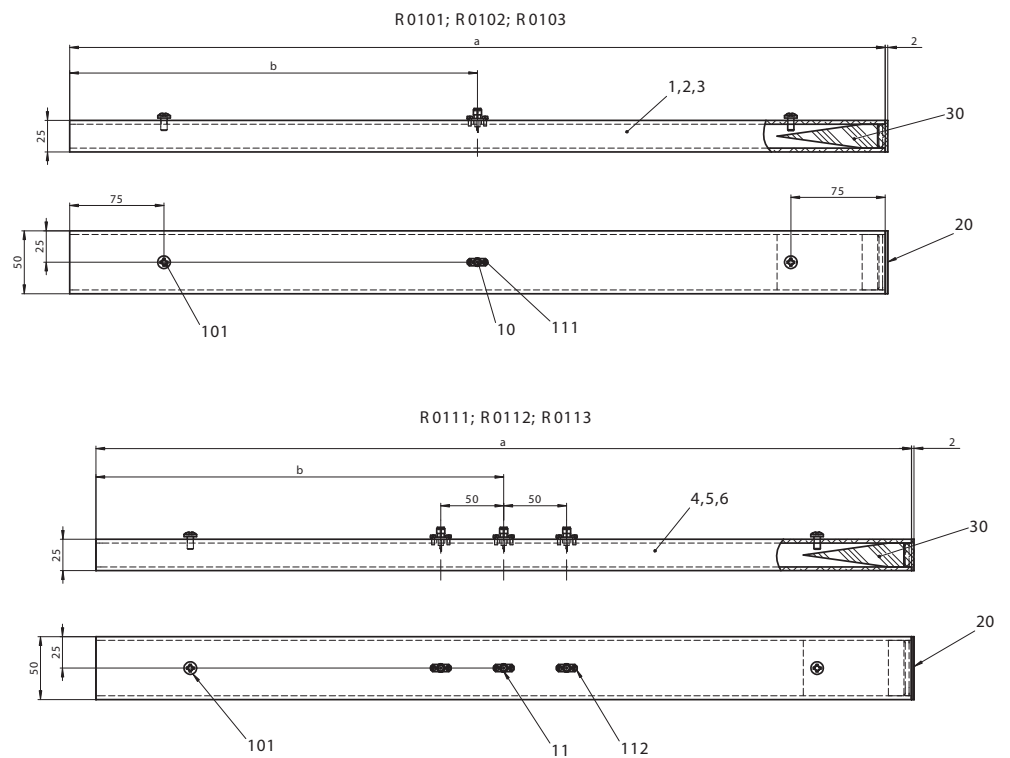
Waveguide tube coax connectors and fixing threads, 1VB8001475
